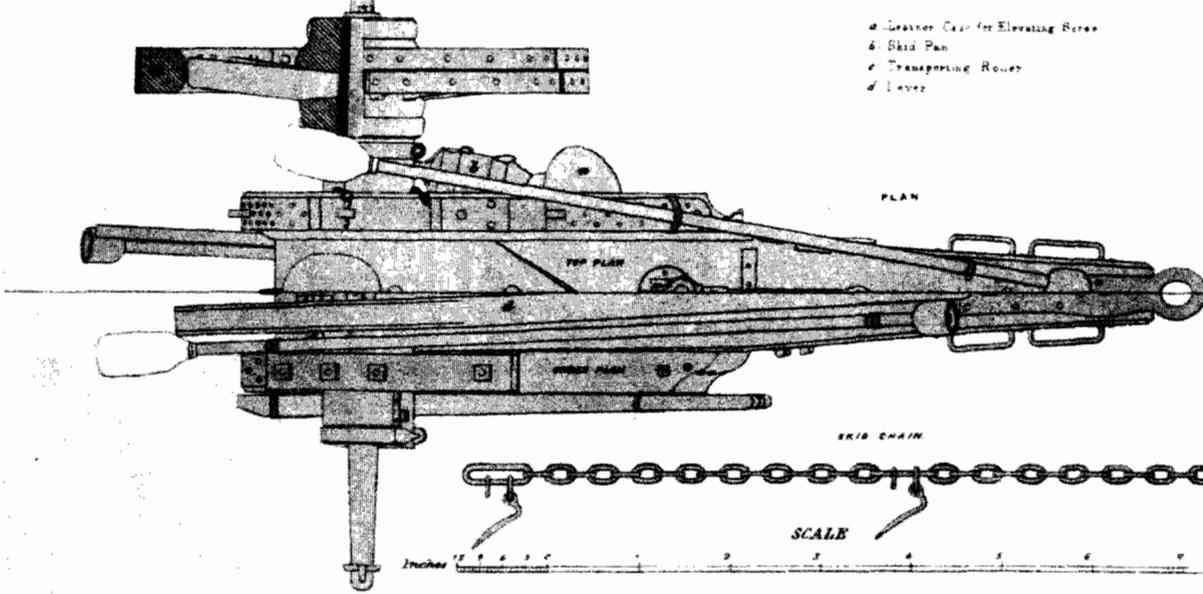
Elevation of an 18-pounder Travelling Carriage. (The Royal Artillery Institution, Woolwich, U.K., Greg, Drawings of Guns, Mortars, Howitzers, etc., 1848.)
